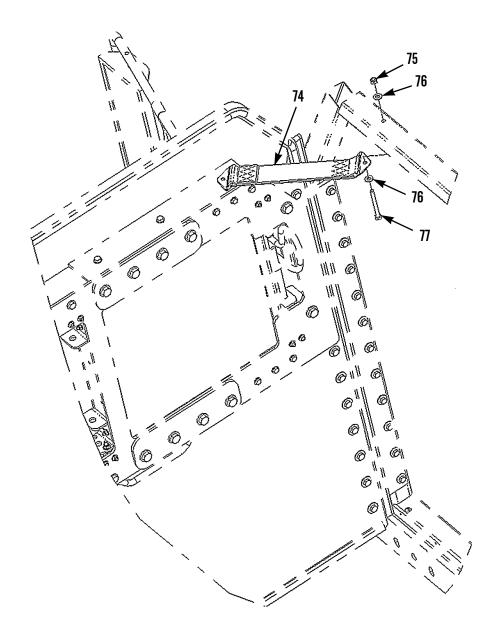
Door Assembly and Mounting Hardware (Sheet 2 of 4)
